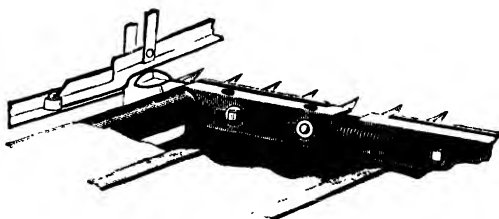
Section of the platform on a Massey-Harris binder, showing spring canvas tensioner
